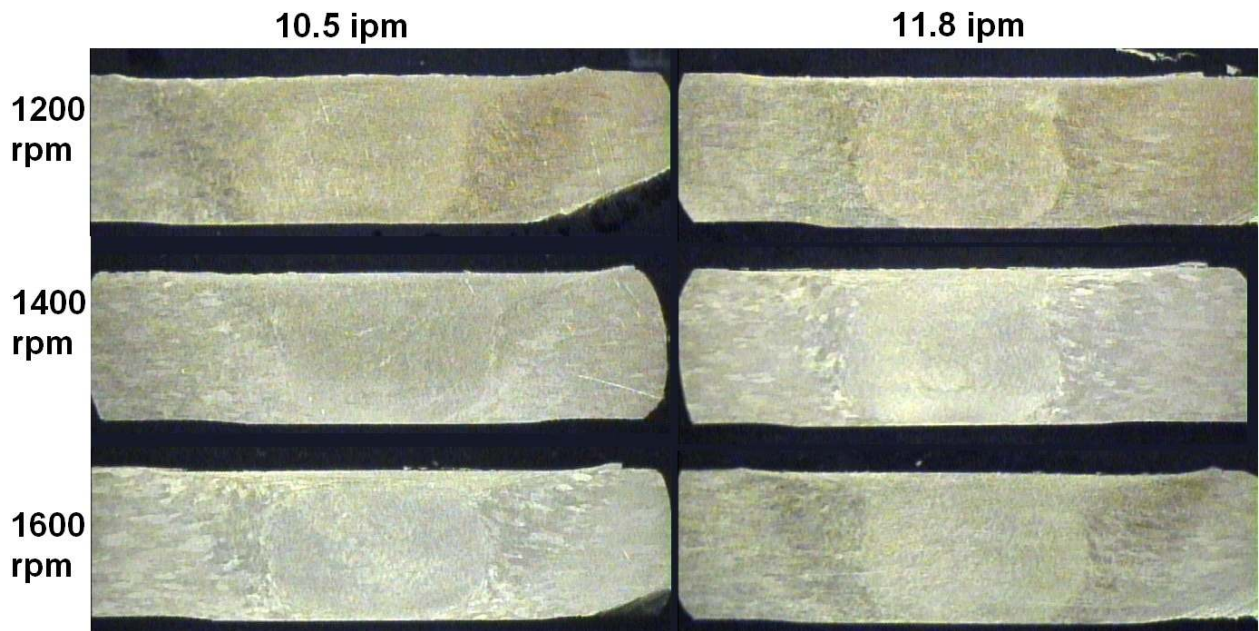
Macrosections of welds made at 10.5 and 11.8ipm with the wide probe tool.
